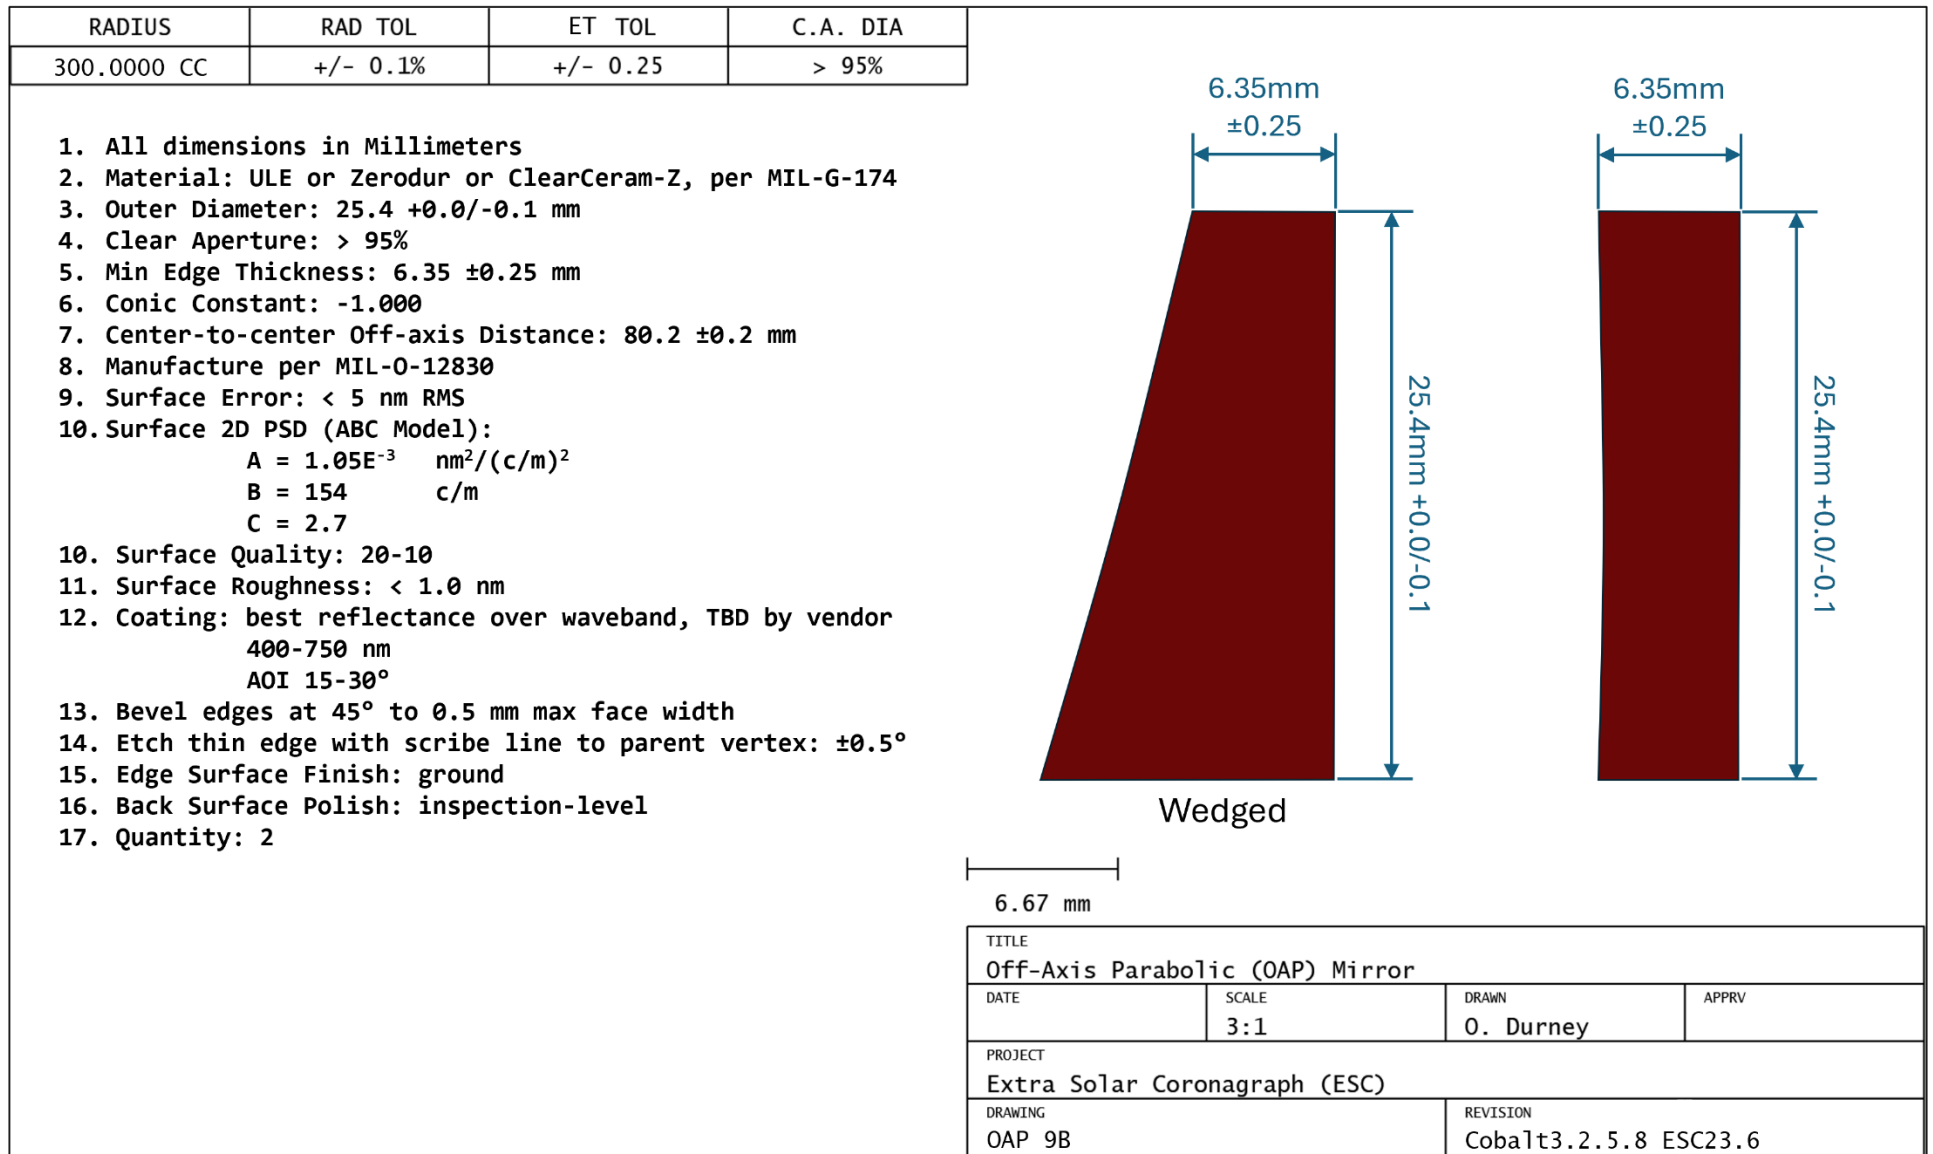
Off-axis parabolic mirror, OAP 9B drawing
